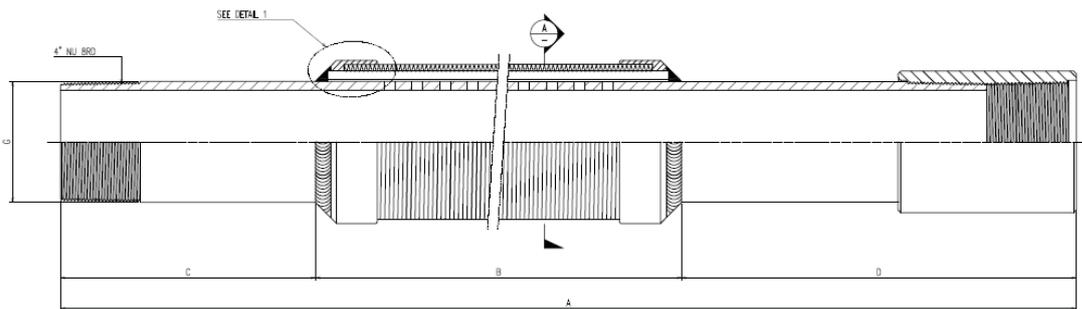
Drawing design of wirewrapped PBS 2-7/8" (slot opening 0.0394" & 0.012")
